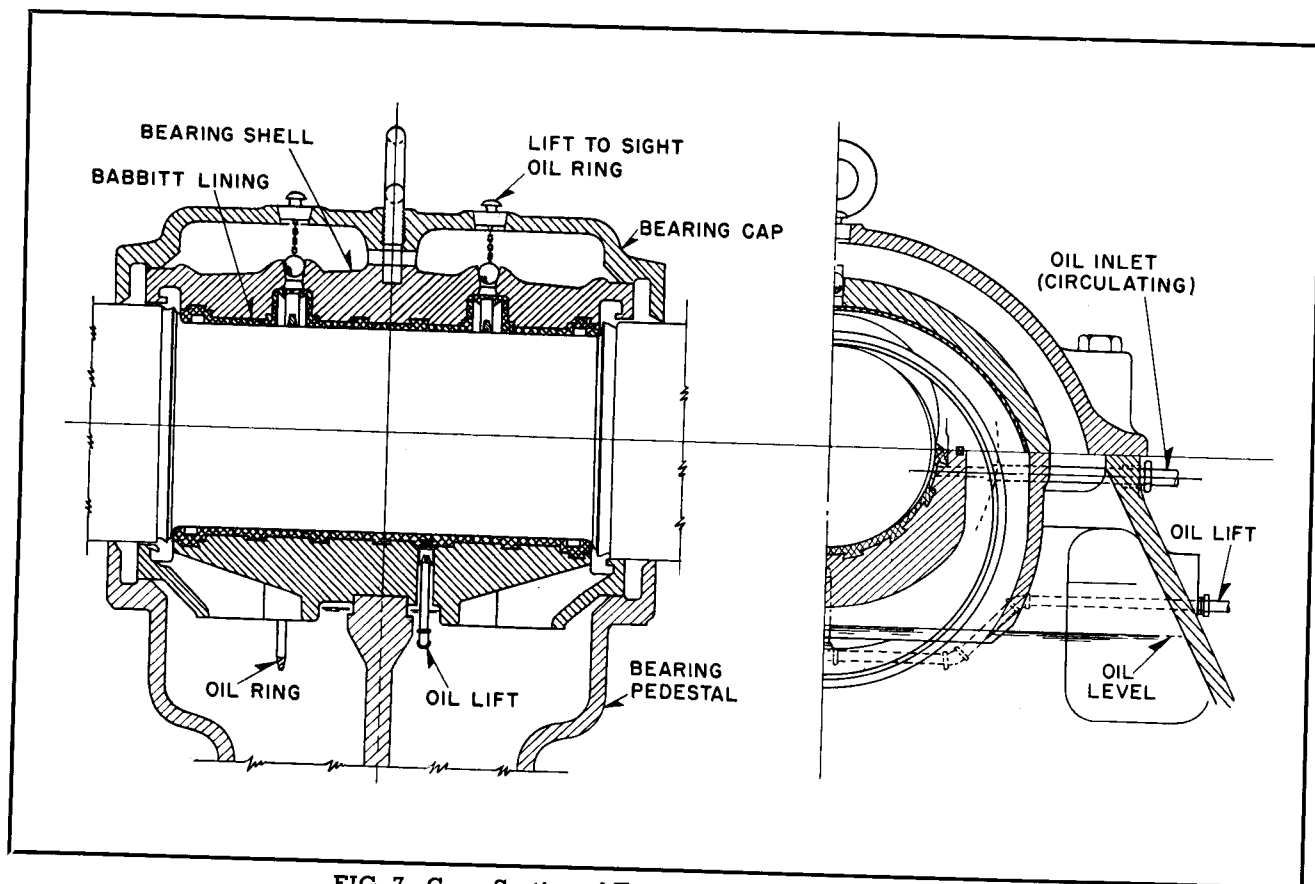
Cross Section of Typical Sleeve Bearing Assembly
